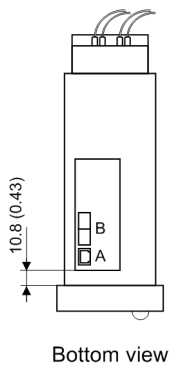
Bottom view of a 7RW80 (housing size 1/6)
